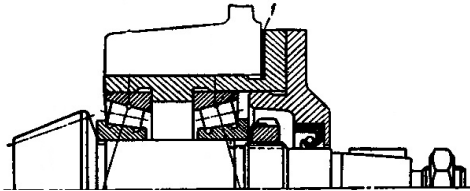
Outward arrangement of bearings of the bevel pinion shaft
